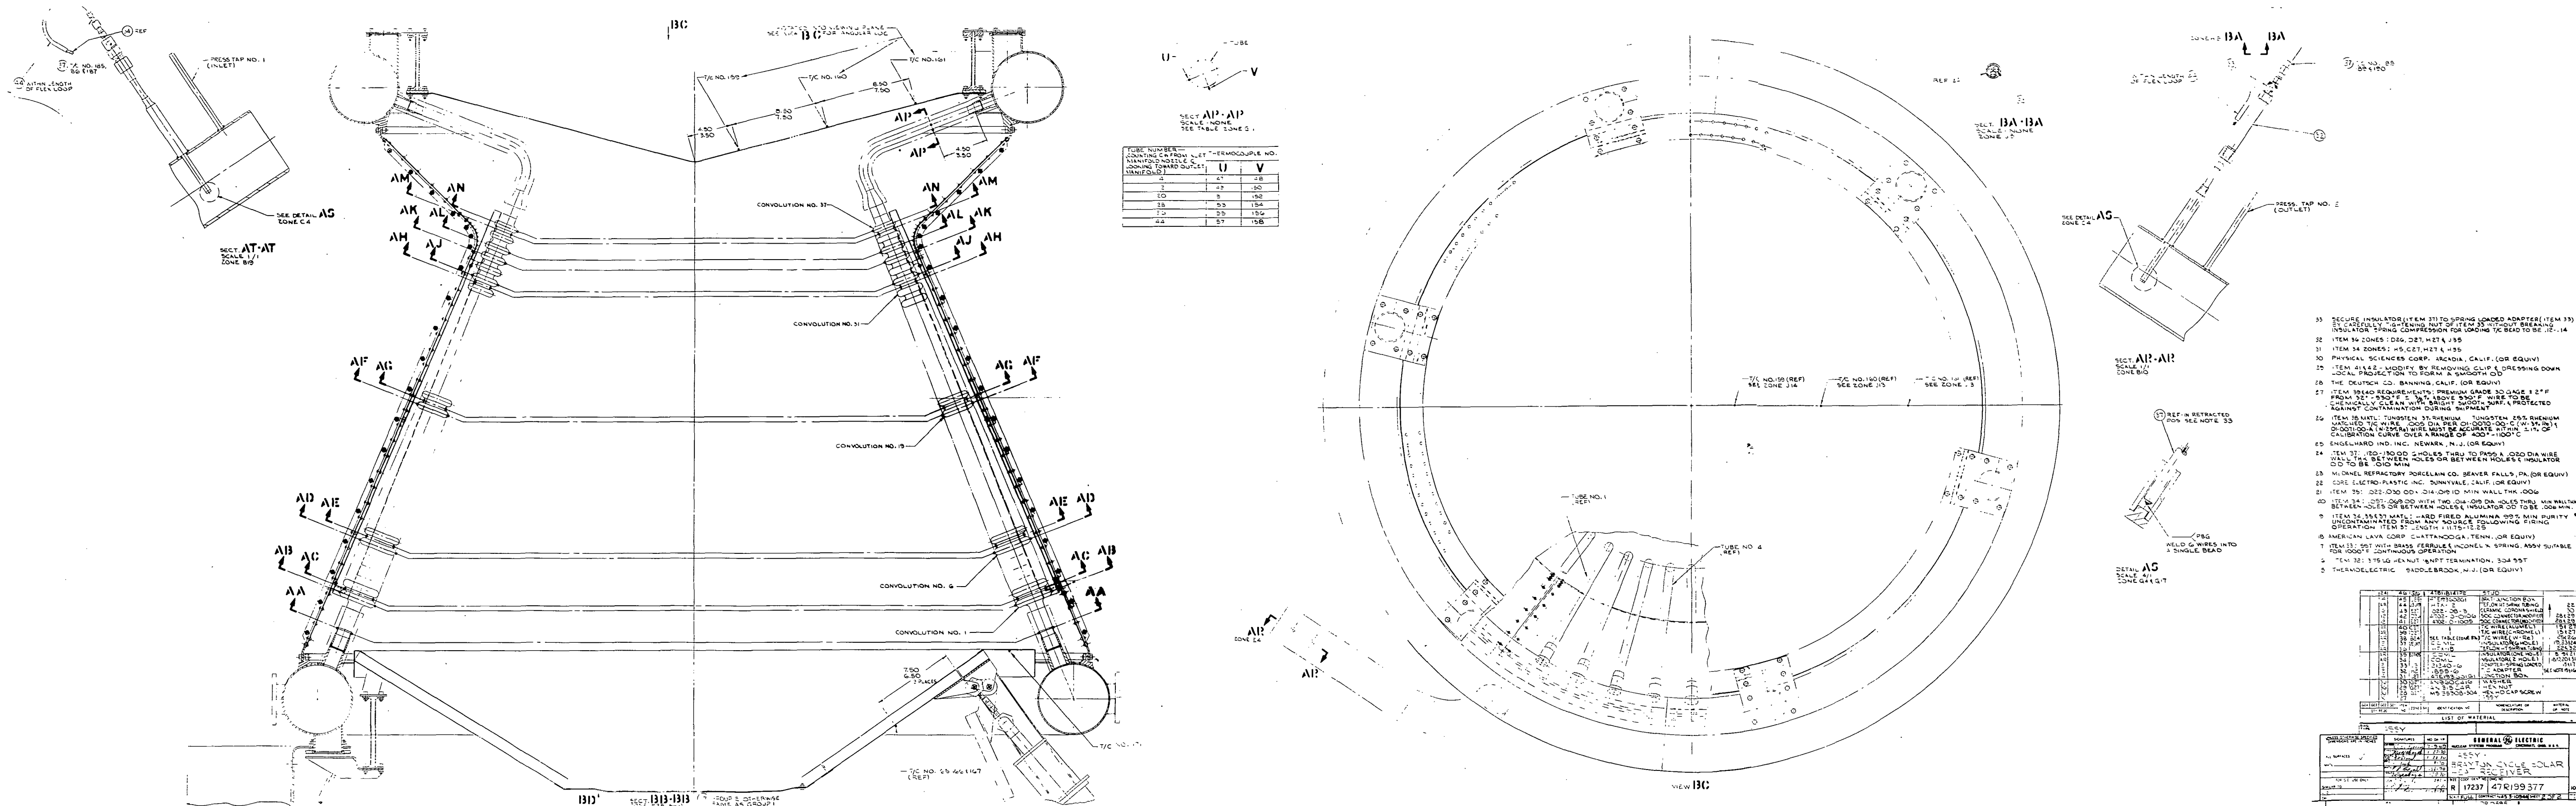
Solar Heat Receiver Assembly (Dwg. 47R199377, Sh. 2)
